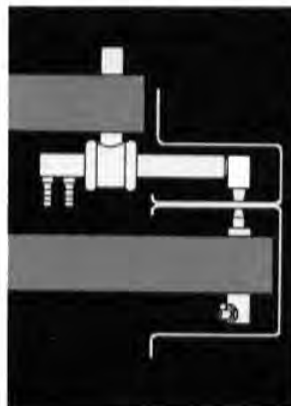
A universal holder (economical because it adjusts to many jobs) over a close-coupled holder.
